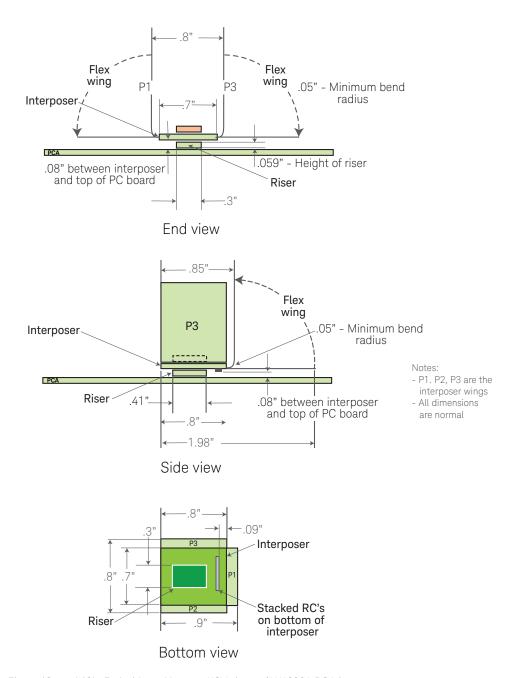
and 19b. End, side and bottom KOV views of W4633A BGA interposer.
